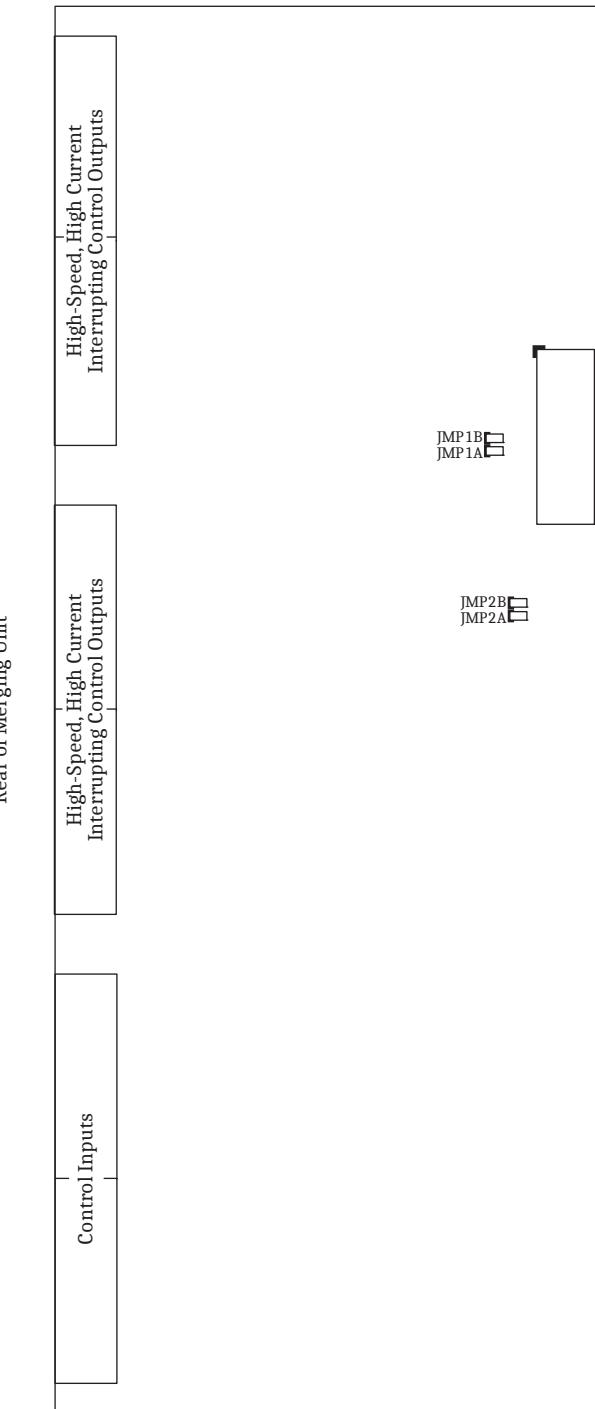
Major Jumper and Connector Locations on the INT8 I/O Board
